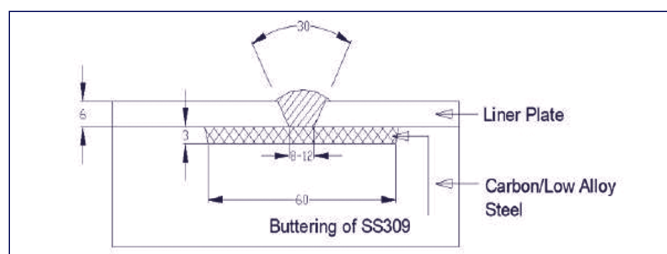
Weld joint configurations for liner attachment weld (all dimensions are in mm)
